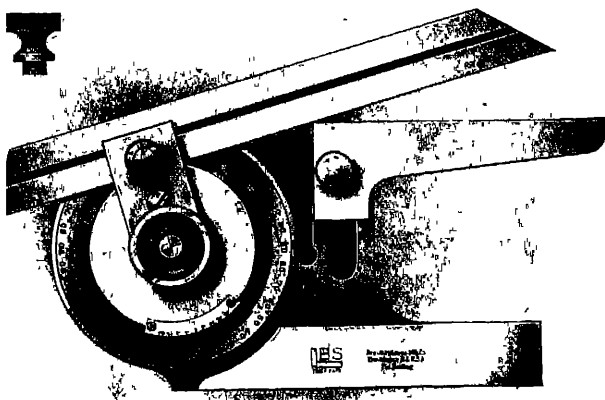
UNIVERSAL BEVEL PROTRACTOR WITH
